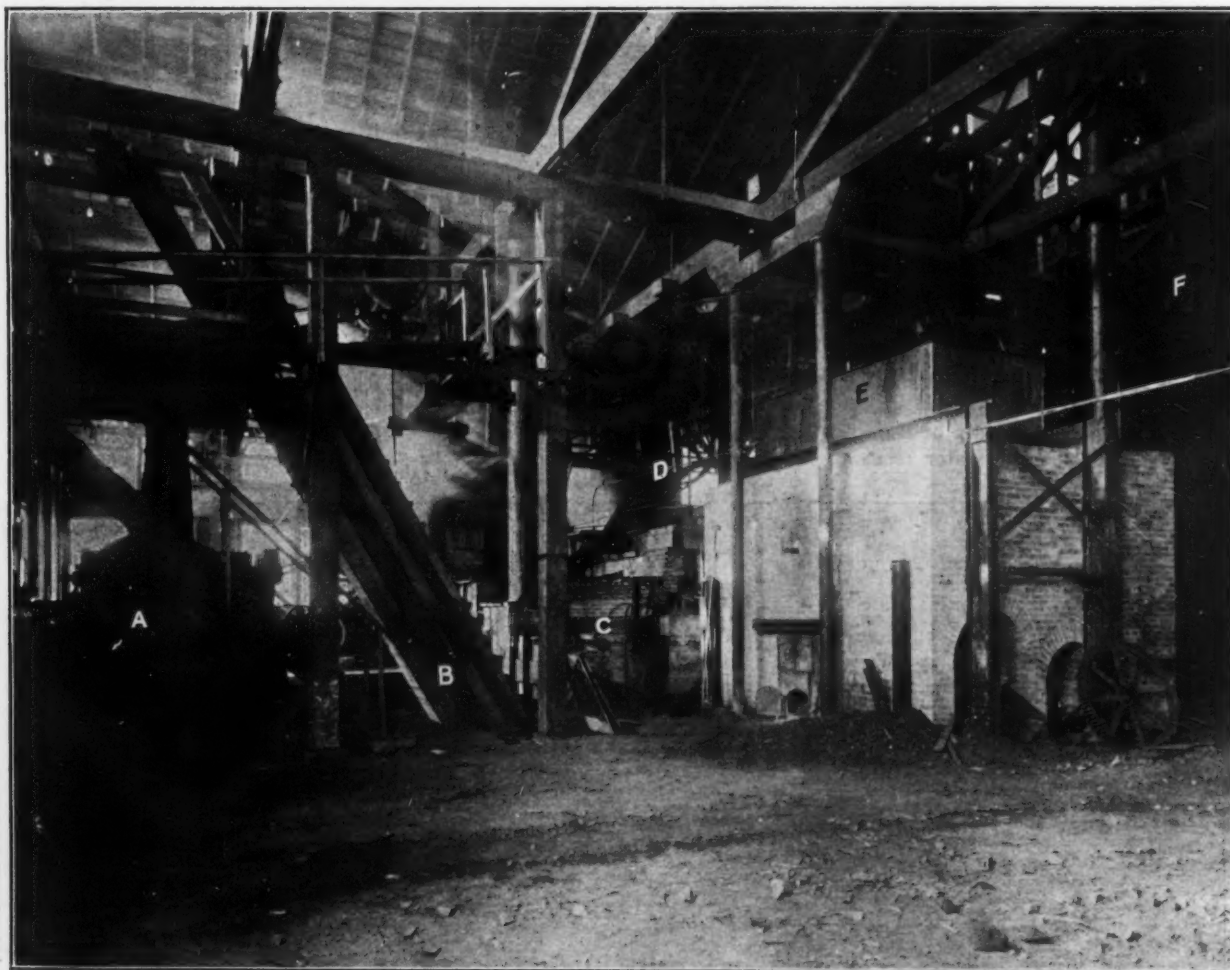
Interior View of the Briquette House at Bankhead Mines, Alberta, Canada.—A, Briquetting Press; B, Elevator from Mixer No. 6 to Press; C, Mixers; D, Pitch Pipe to Mixers; E, Pitch Tank; F, Dust Bin.
